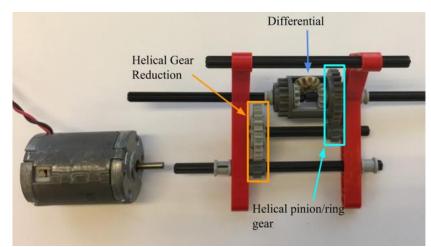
Concept 3: Transversely mounted motor with helical gear reduction and helical ring gear differential.
